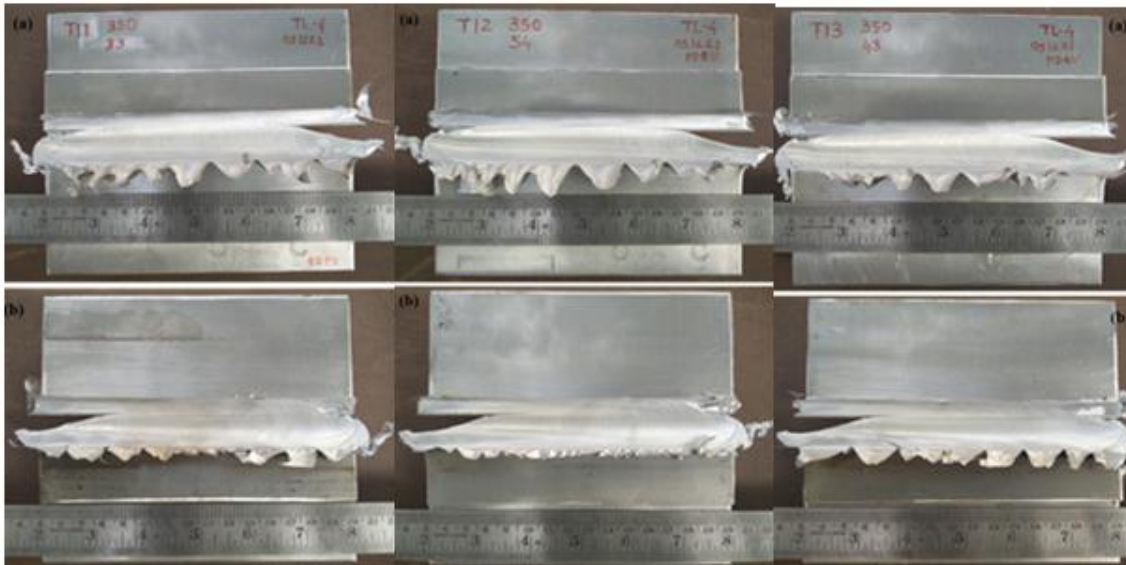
(left) Weld formation in experiment-15, (a) Top surface, (b) Bottom surface; (middle) Weld formation, in experiment-16, (a) Top surface, (b) Bottom surface; (right) Weld formation in experiment-17, (a) Top surface, (b) Bottom surface
